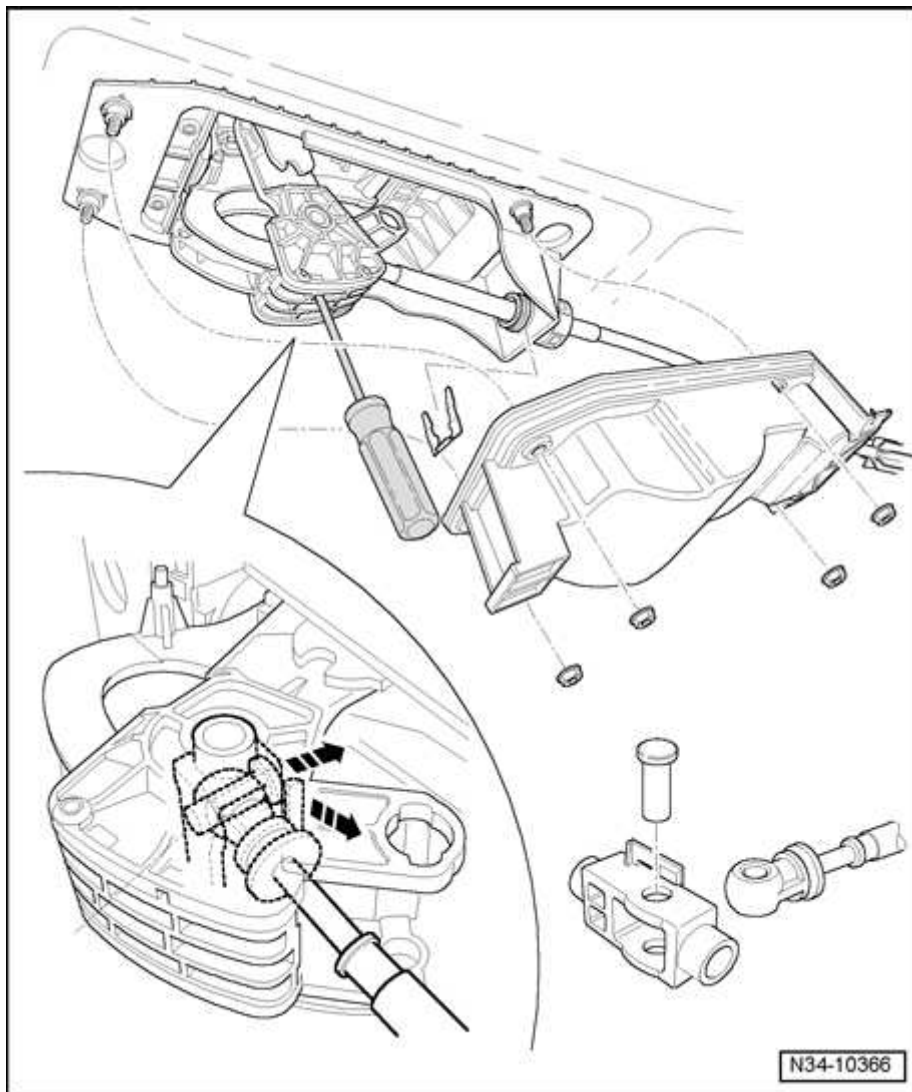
Removing Selector Lever Cable From Shift Mechanism
